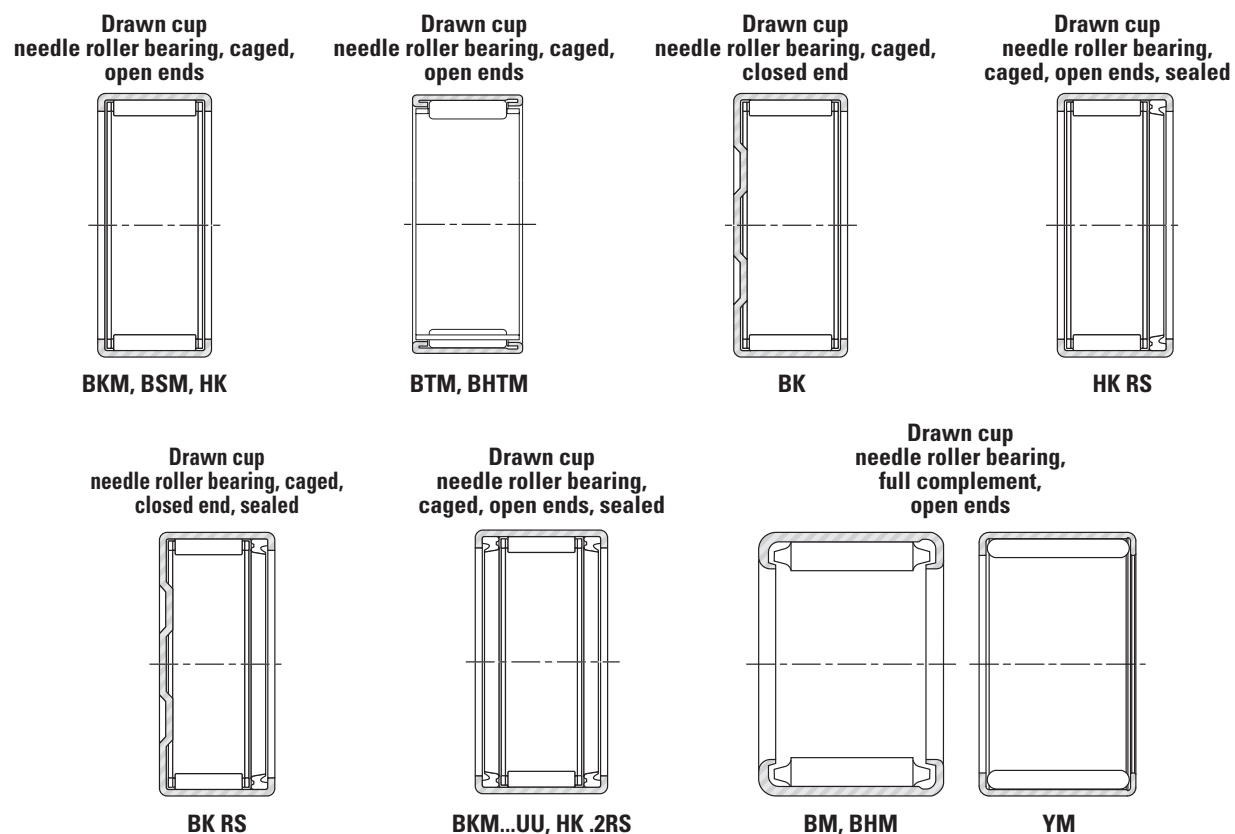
Types of metric series drawn cup needle roller bearings
